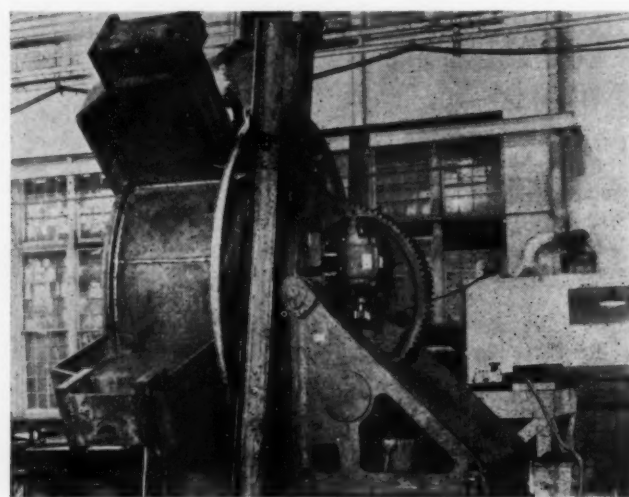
LOWER THRUST-BEARING BRACKET FOR WATER-WHEEL GENERATOR MOUNTED ON MANIPULATOR
